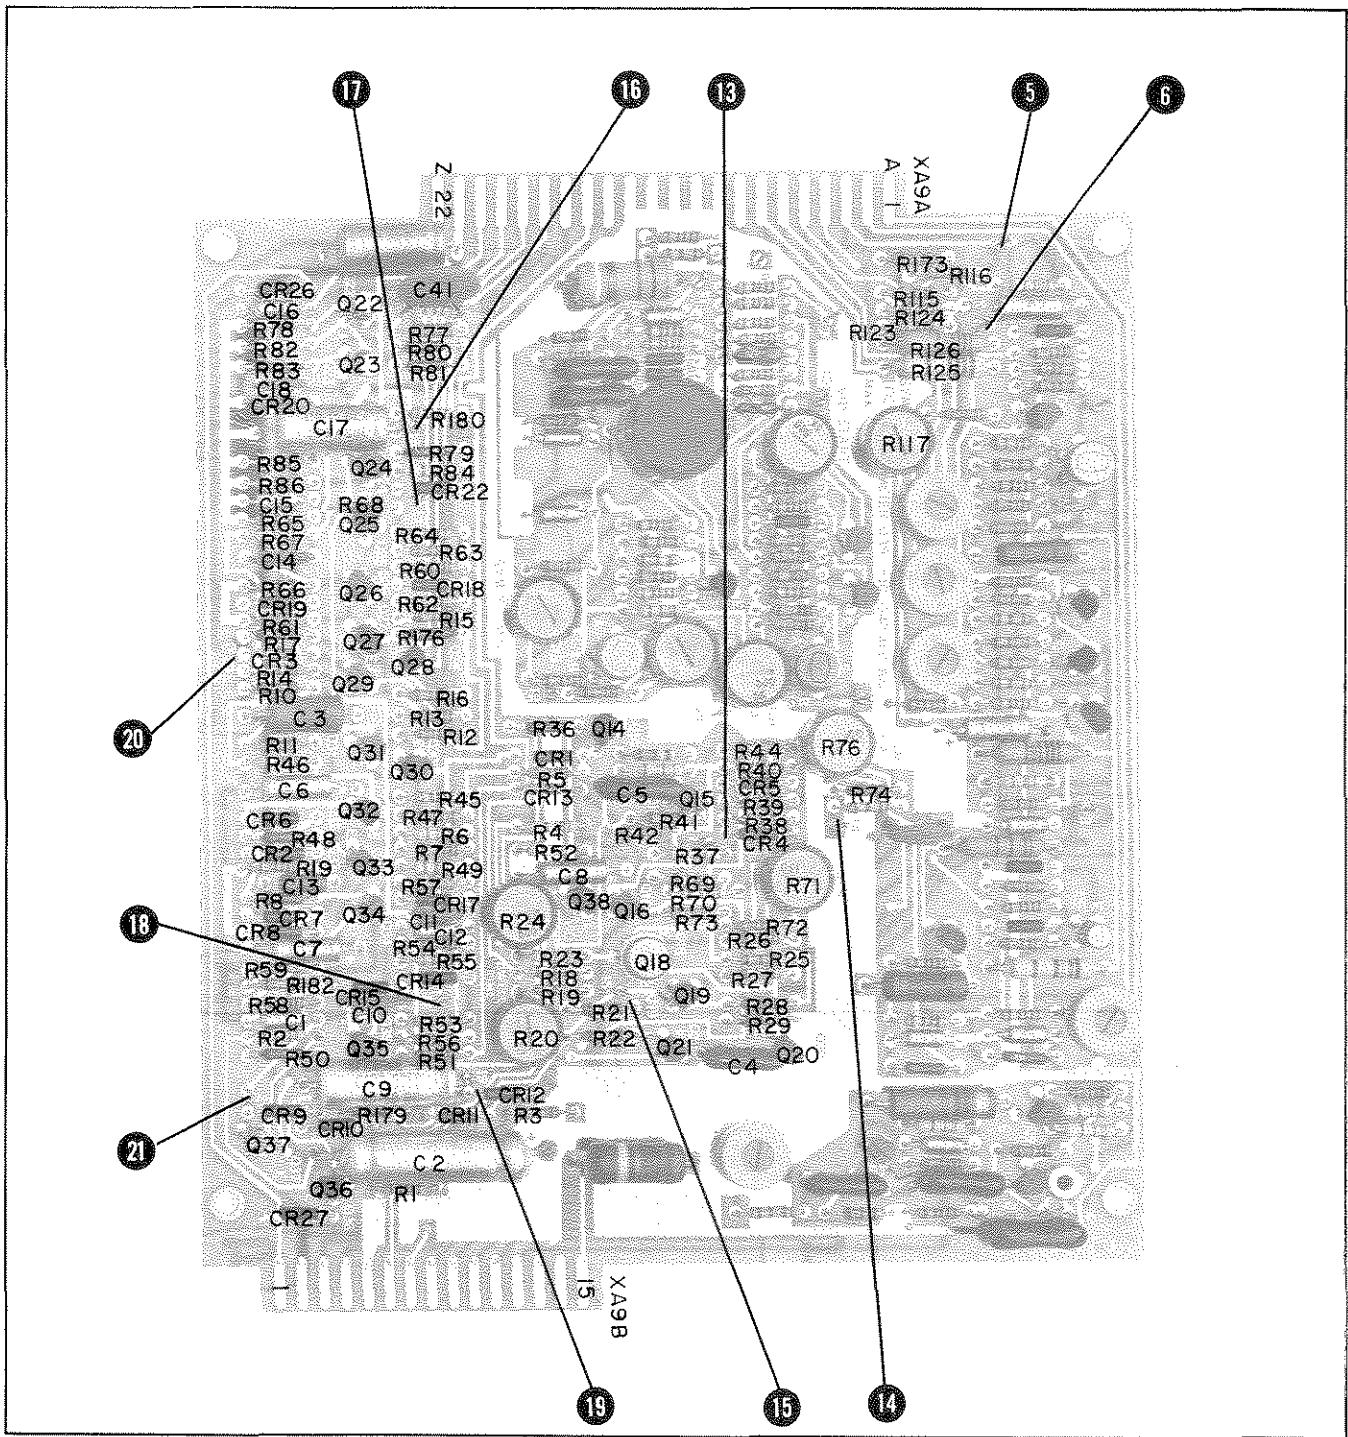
Component Identification, Sweep Generator, P/O A9
